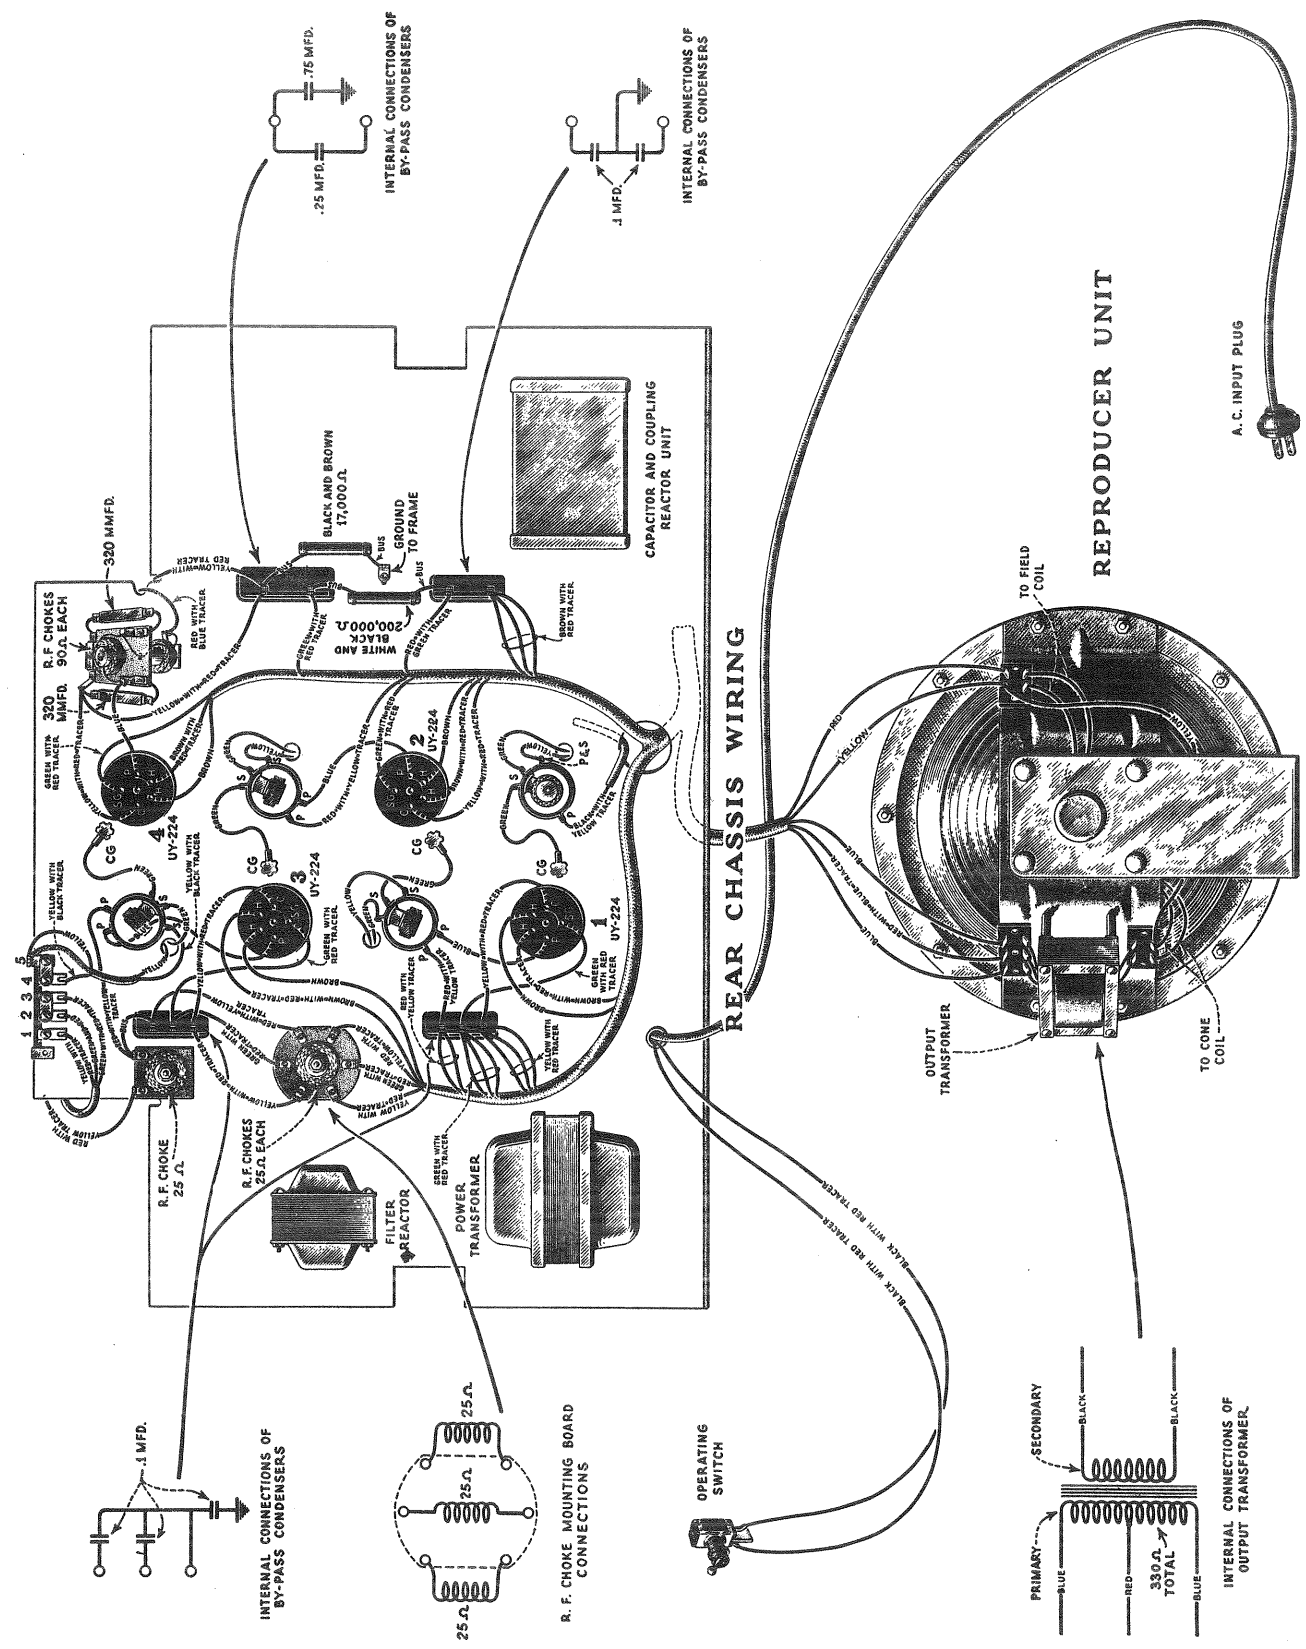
B—Complete layout and wiring diagram of the chassis (rear) and reproducer unit
